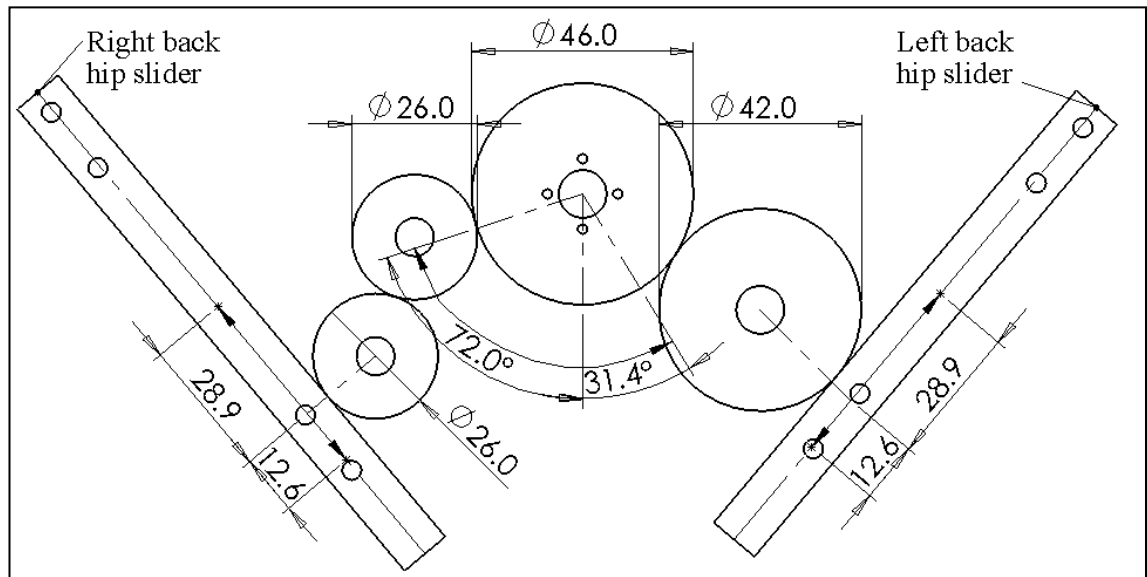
Back hip mechanism schematic diagram. The solid arrow shows the movement direction. All linear dimensions are in mm.
